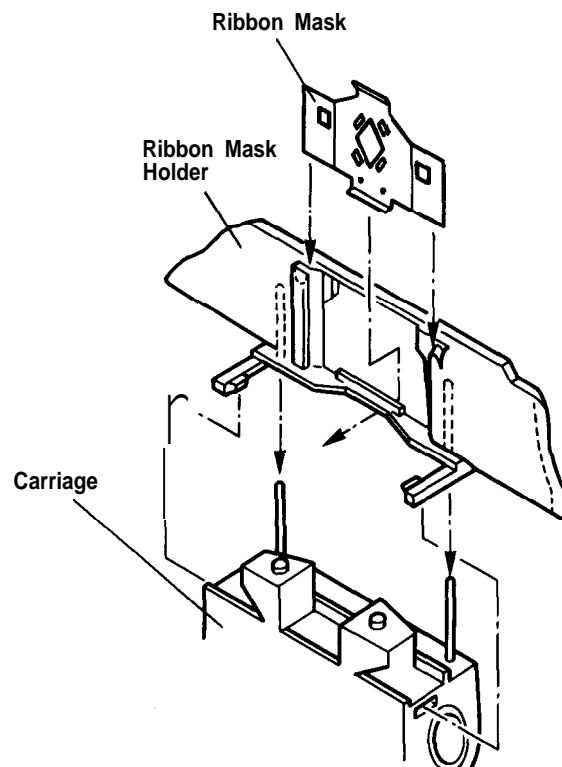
Ribbon Mask Holder and Ribbon Mask Configuration
